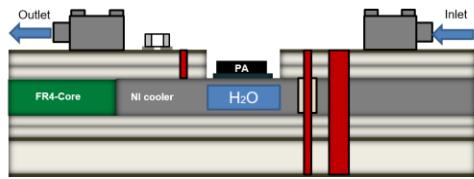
Multilayer PCB with 800µm-thick embedded 3D-SLM-printed Ni-cooler
